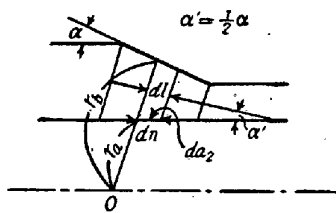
Plug drawing process. (Inside dia of tubes remained constant)
